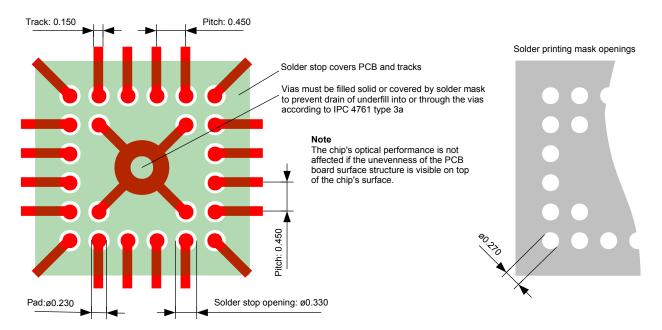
Example 1 of a recommended, balanced fine-line PCB design for epc611 with a "closed" center via of the GND pads (dimensions in mm)
